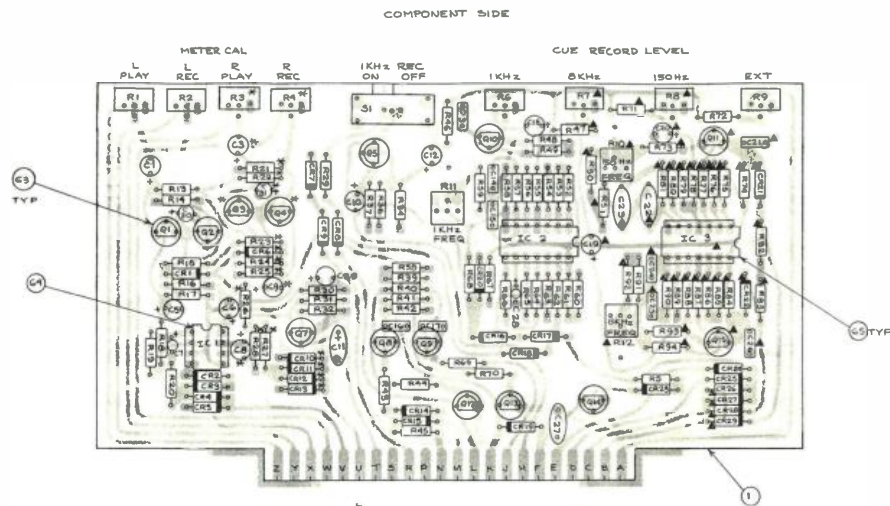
Assembly Diagram and Parts List, Record Amplifier/Bias PCB
